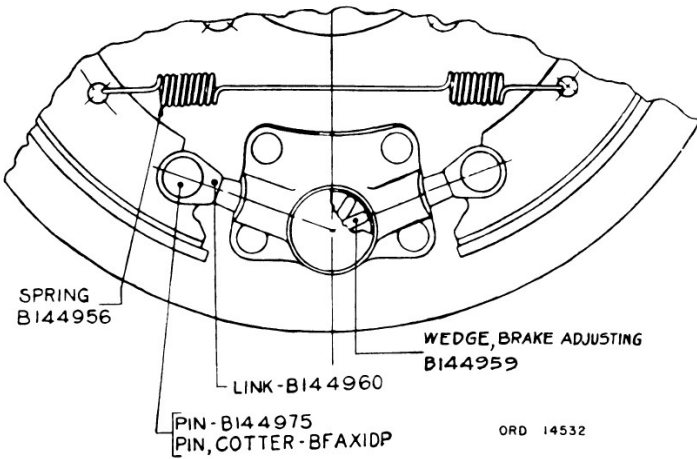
75-mm howitzer carriage, M3A1—portion of brake mechanism showing adjusting wedge.
